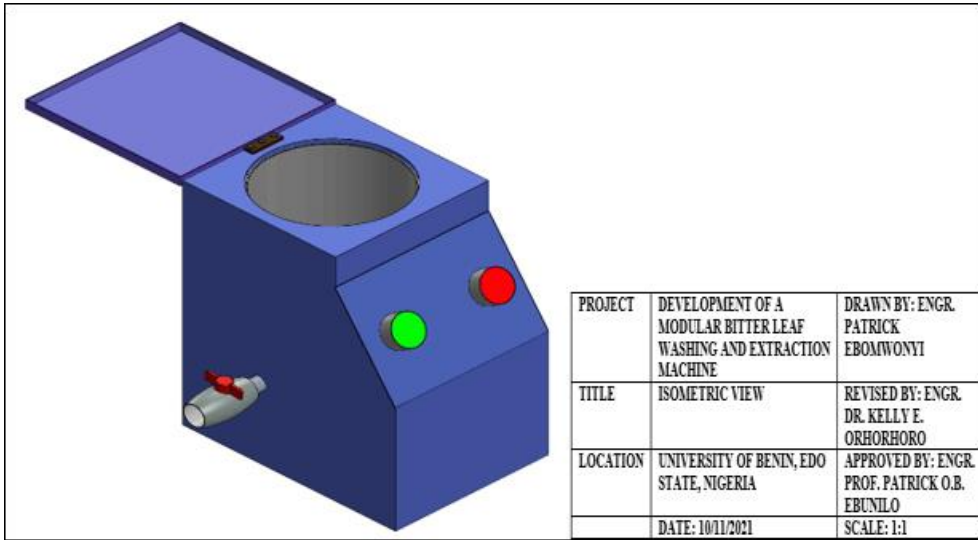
Isometric view of the modular bitter leaf washing and extraction machine
